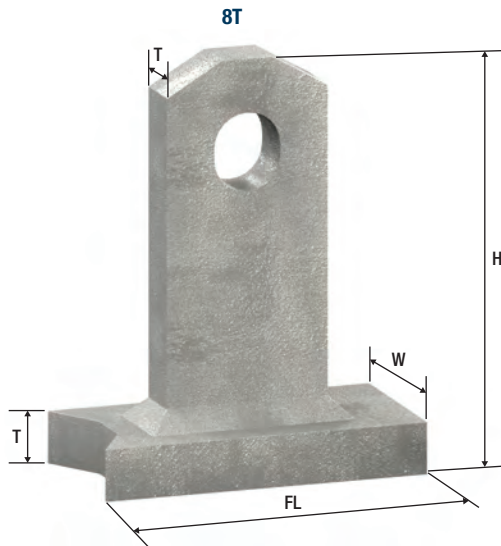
PLATE ANCHOR DIMENSIONS AND LOAD CHART
